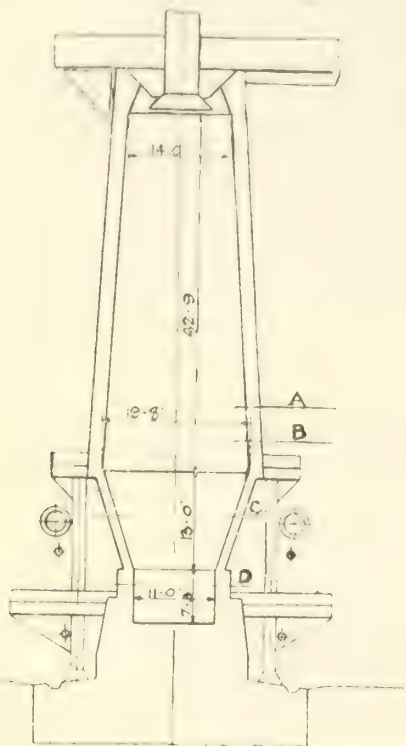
LOCATION OF THE BOSH TUYERES.
